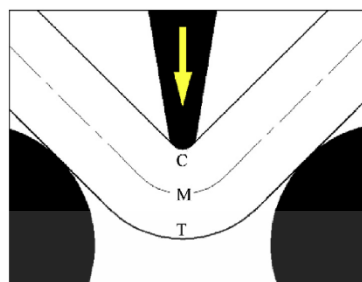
Cross-section of a steel specimen for a 45° bending angle.
